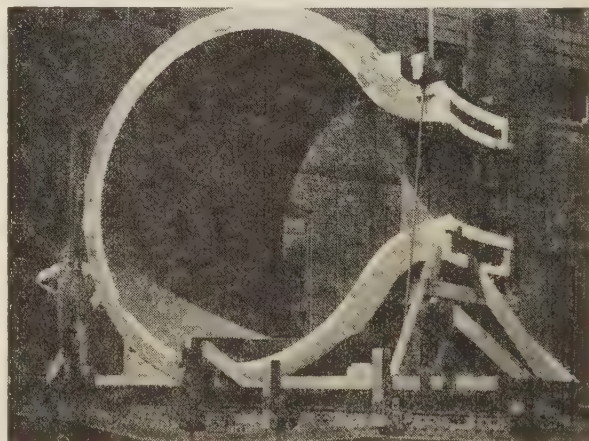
CASTING FOR CASING SECTION NO. 7; WEIGHT 38,000 LB
